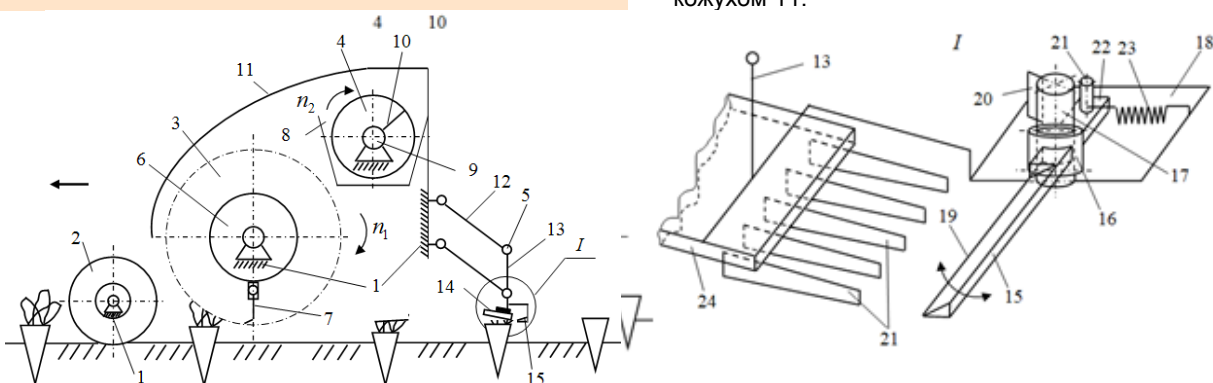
Constructive scheme of the improved machine for haulm cutting:
